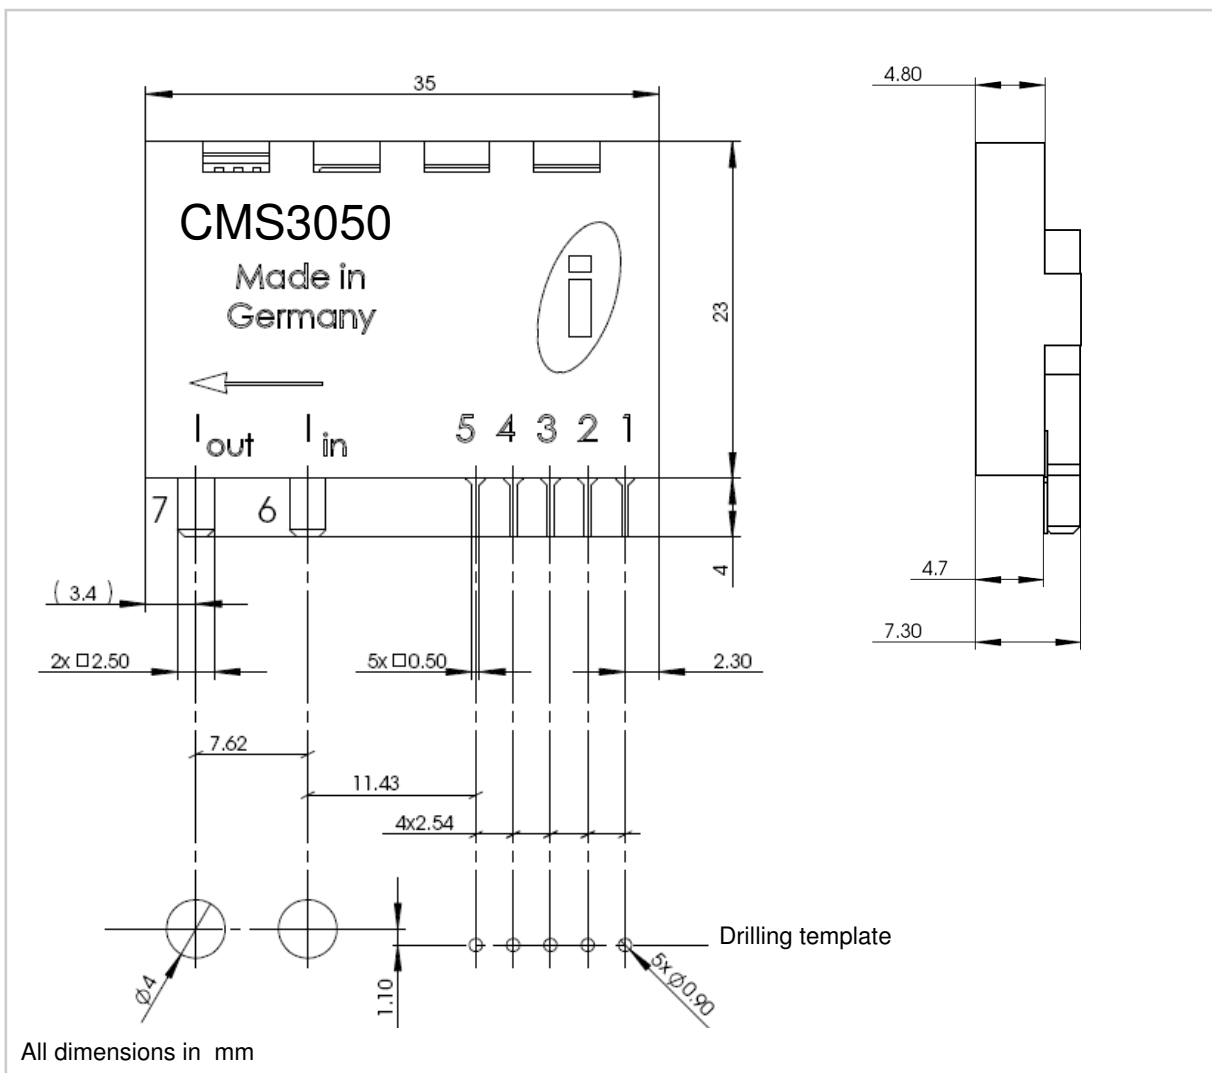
Package outline with $\pm 0.2\text{ mm}$ tolerance and drilling plan with 0.05 mm tolerance.
